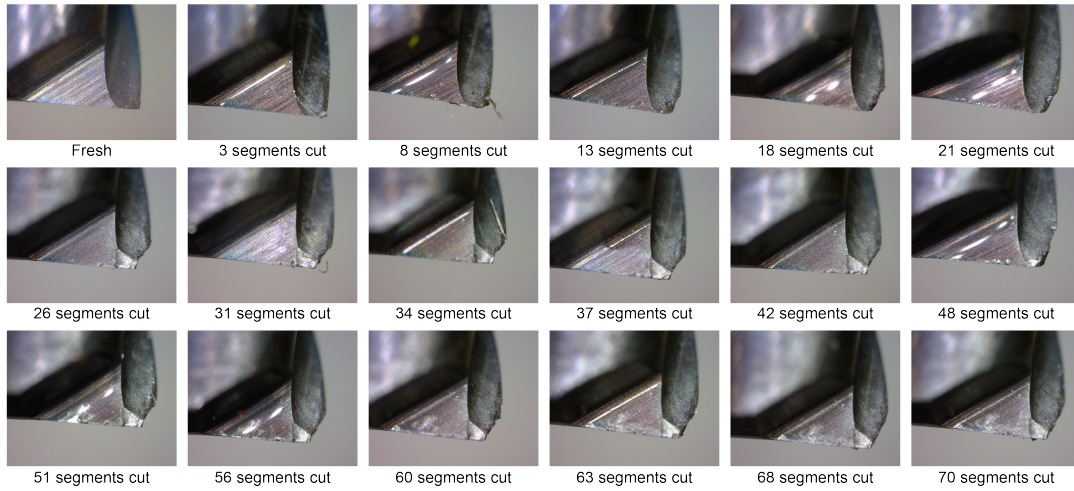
Tool wear progression for workpiece #8 tool #1
